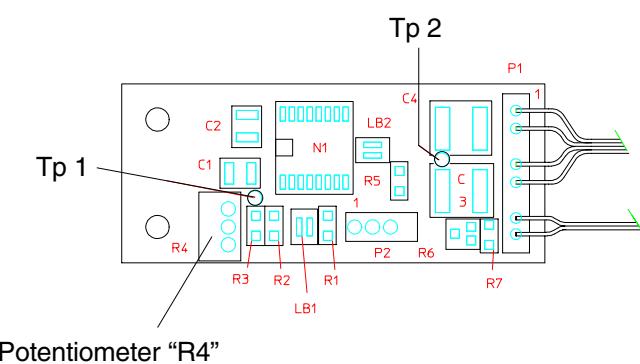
PCB "OXS", assembled, horizontal projection
